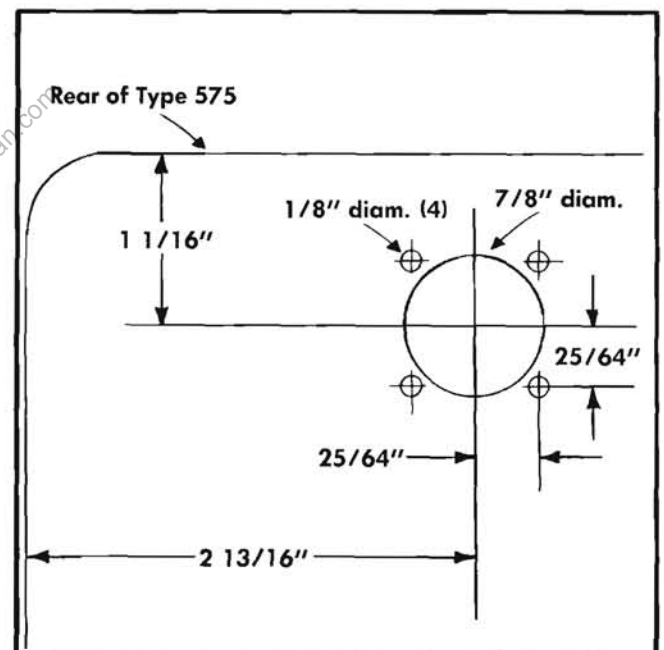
Location and dimensions of holes for mounting interconnecting plug in Type 575.
